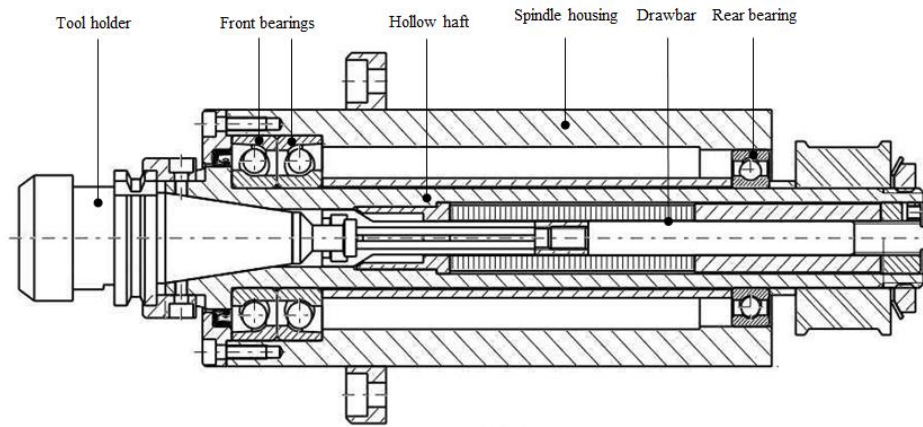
Typical spindle assembly for belt driven spindle. Edited from (www.cnccookbook.com)
